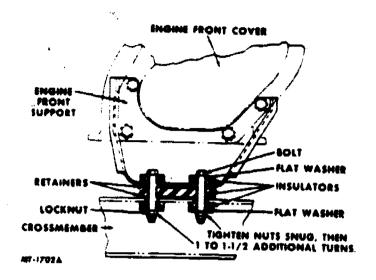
Engine Front Mounting With 5-Piece Insulator (Medium-Duty Models).
